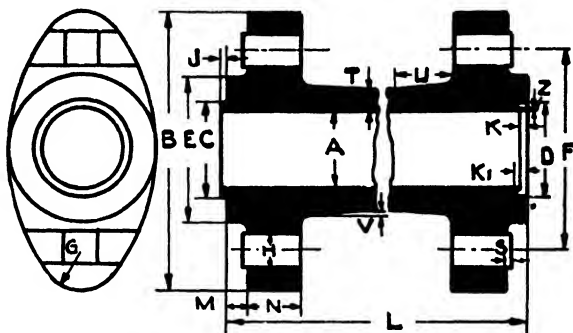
British Standard Hydraulic Power Pipes : Flange Type 2.
